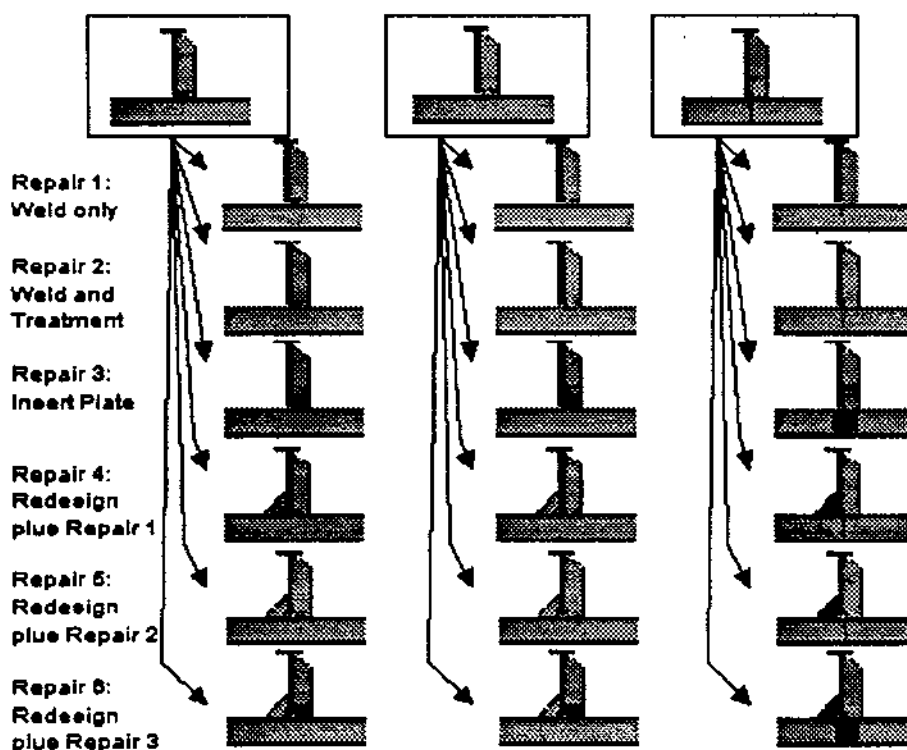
Repair alternatives for cracks in flat bar stiffeners
